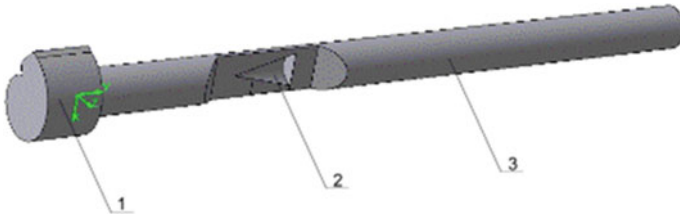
Three-dimensional solid-state model of the internal space of a passive tangential vortex heat generator with a nozzle input by A. P. Merkulov. 1—Nozzle inlet according to A. P. Merkulov; 2—brake cone-shaped device; 3—straight cylindrical working chamber
